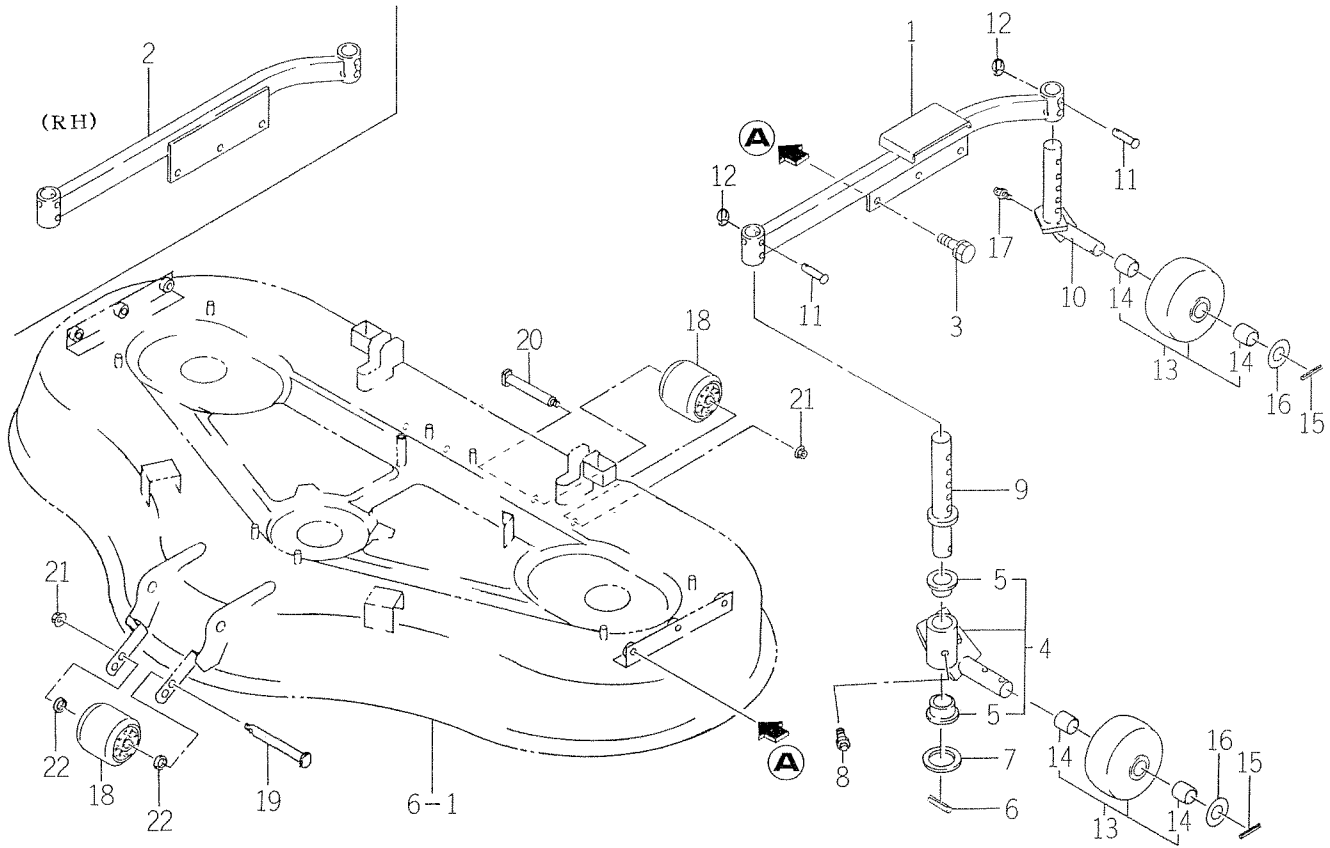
GAUGE WHEEL SYSTEM (F TYPE)
